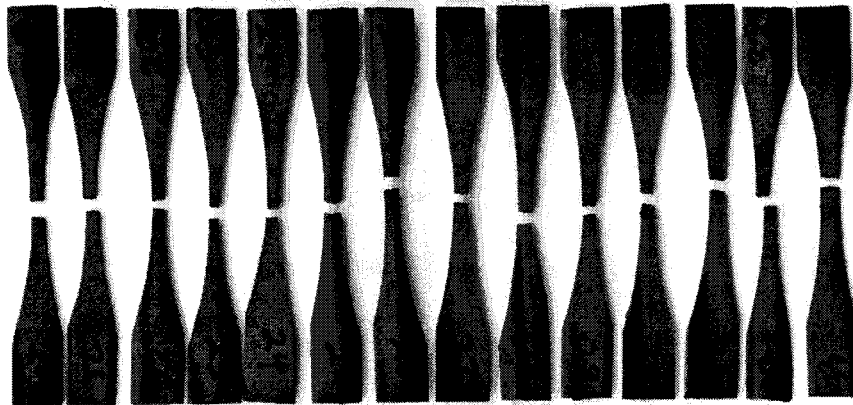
Typical Tension Coupon Static and Fatigue Failures.
